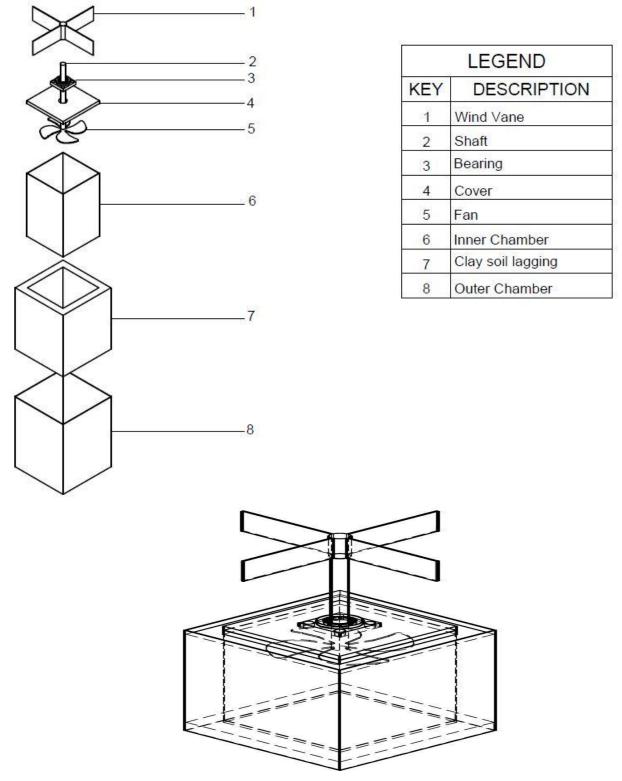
Exploded and Isometric View of Square Wind Operated Evaporative Cooling Structure
